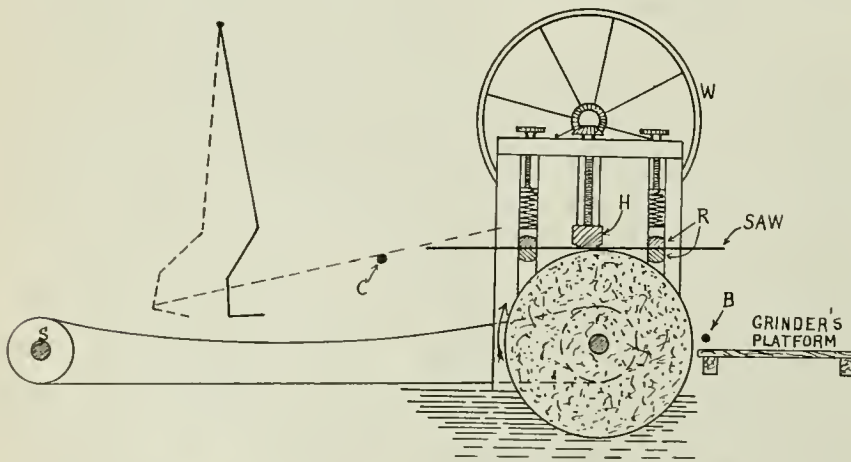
DIAGRAM ILLUSTRATING PRINCIPLE OF SAW GRINDING MACHINE.
